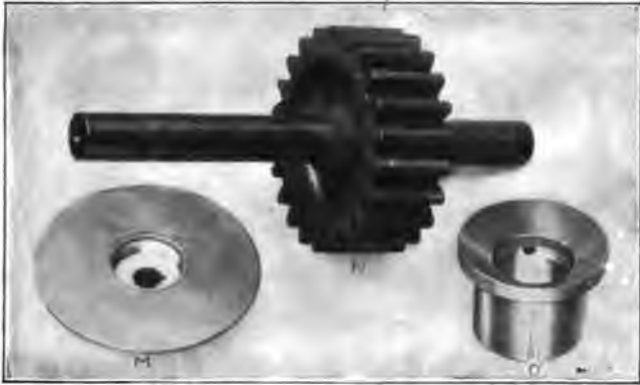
Die-castings showing Impractical Under-cut Sections; also a Large Gear die-cast on Shaft
